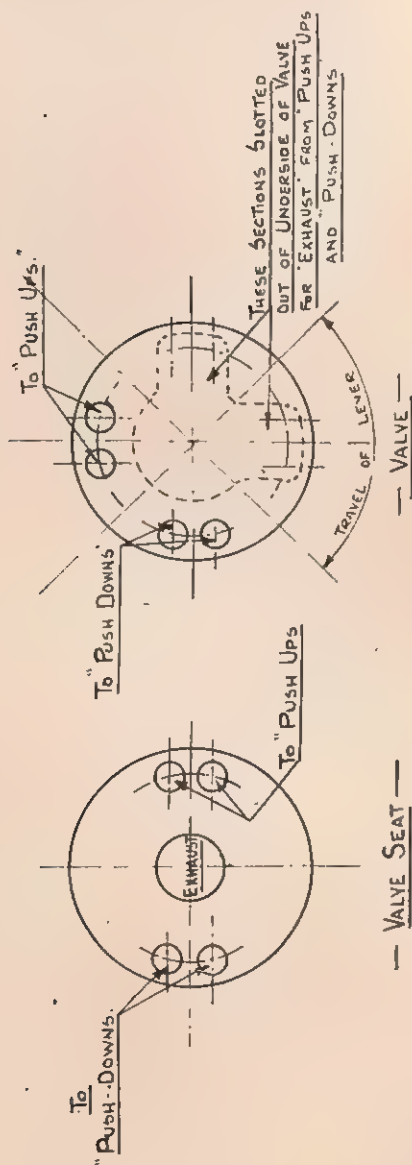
Valve and Seat for Double-Acting Rotary Face Valve.
